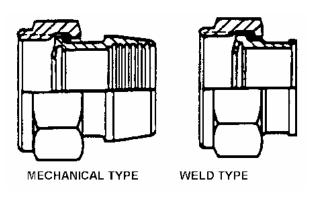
Typical Welded and Mechanically Attached Dynatube Fittings
